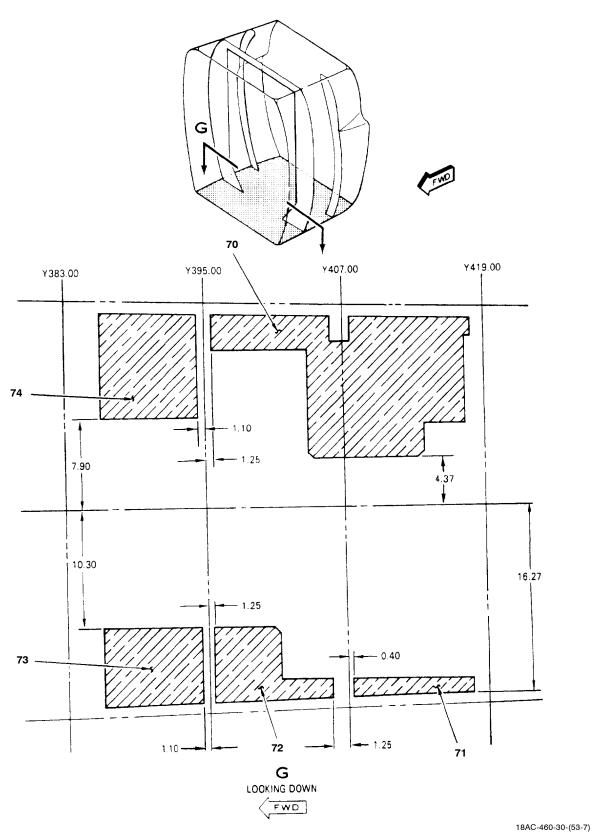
No. 2 Fuel Tank Cavity Foam Filler - 161353 THRU 161741 (Sheet 7)
